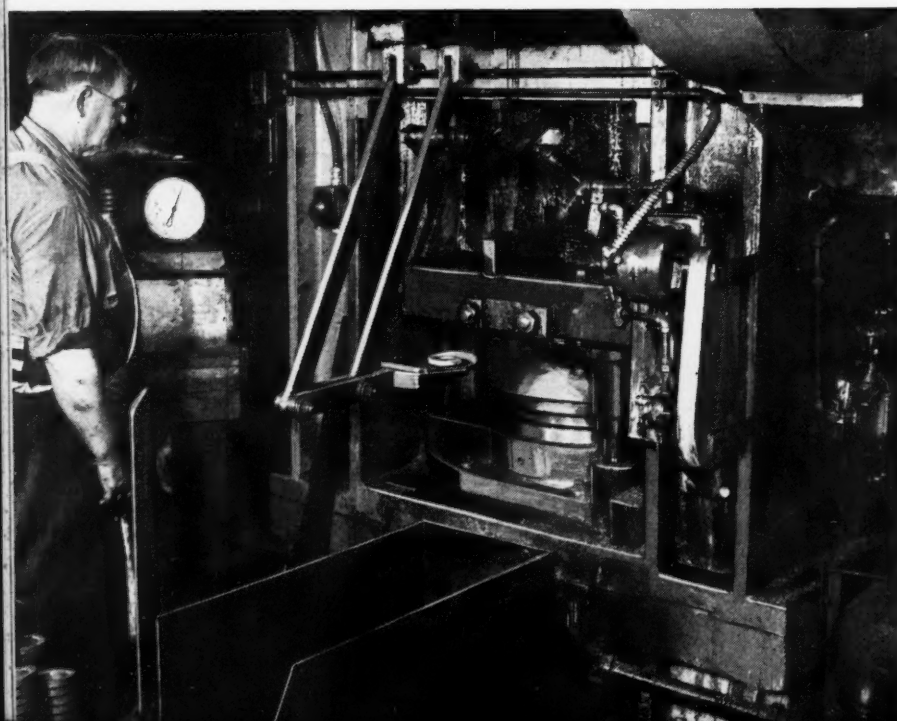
The Unloading Side of the Briquette Forming Press Shown in the Heading Illustration, where Cold-formed Parts are Removed from the Swinging Shovel, Weighed, and Stacked
